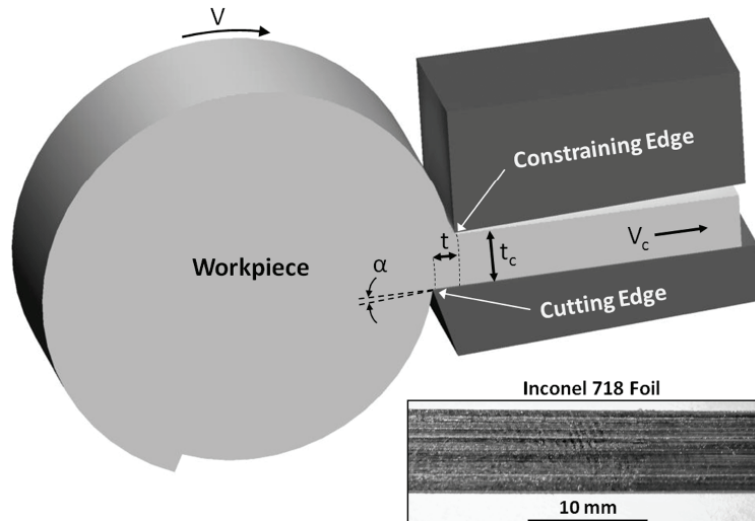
Schematic of Large Strain Extrusion Machining (LSEM). Insert at the Bottom Right Shows a Typical Inconel 718 Foil Strip Created Using This Process
